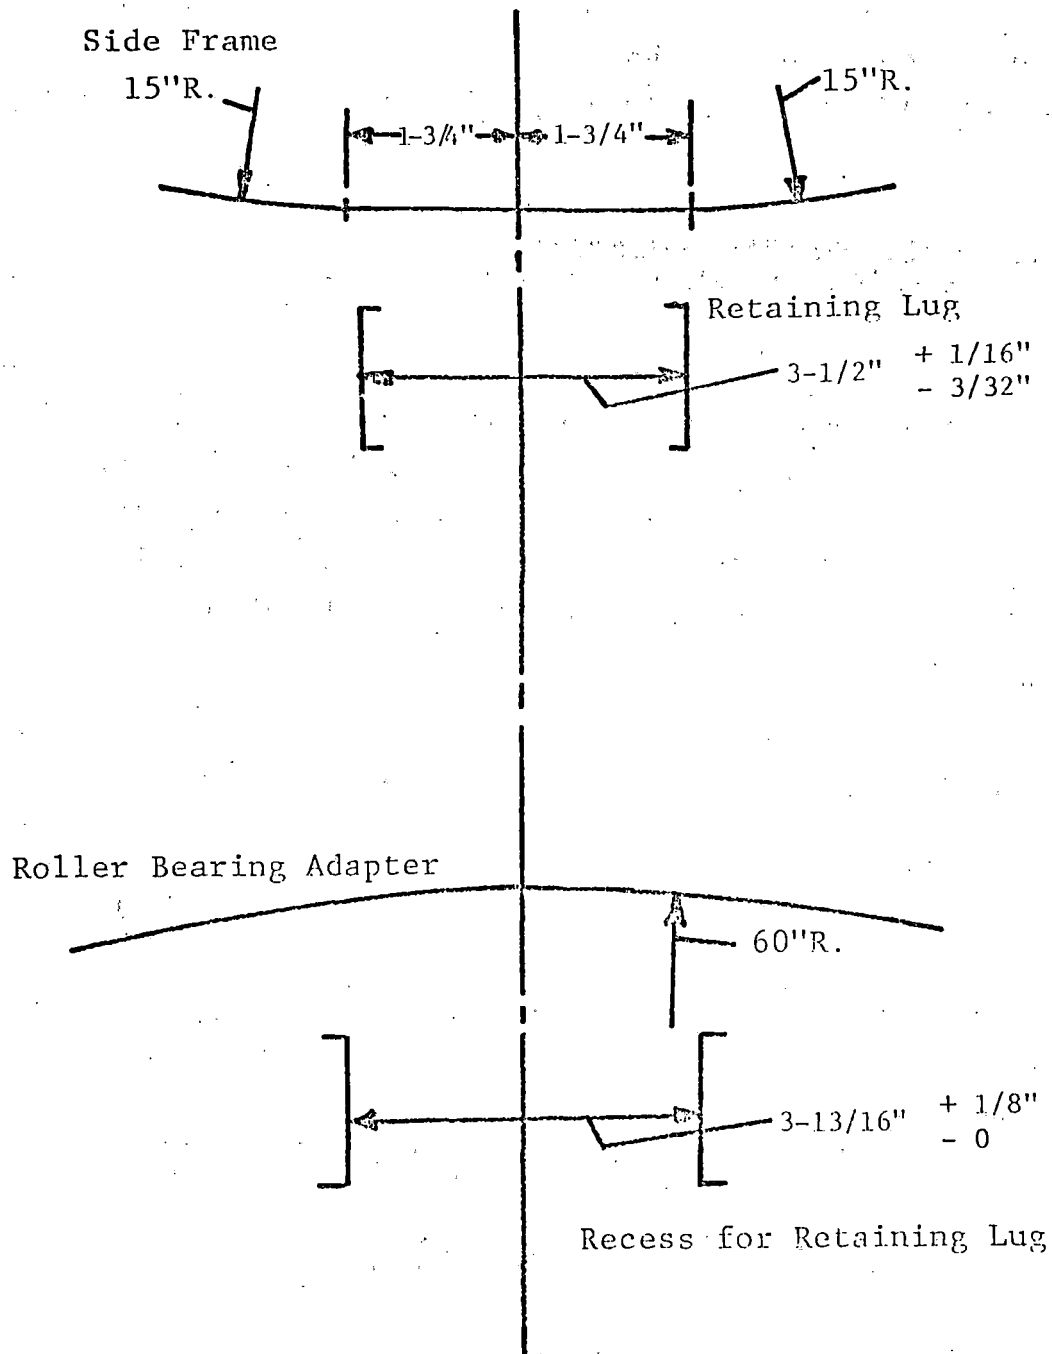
SECTION THROUGH SIDE-FRAME-PEDESTAL/ROLLER-BEARING-ADAPTER INTERFACE
